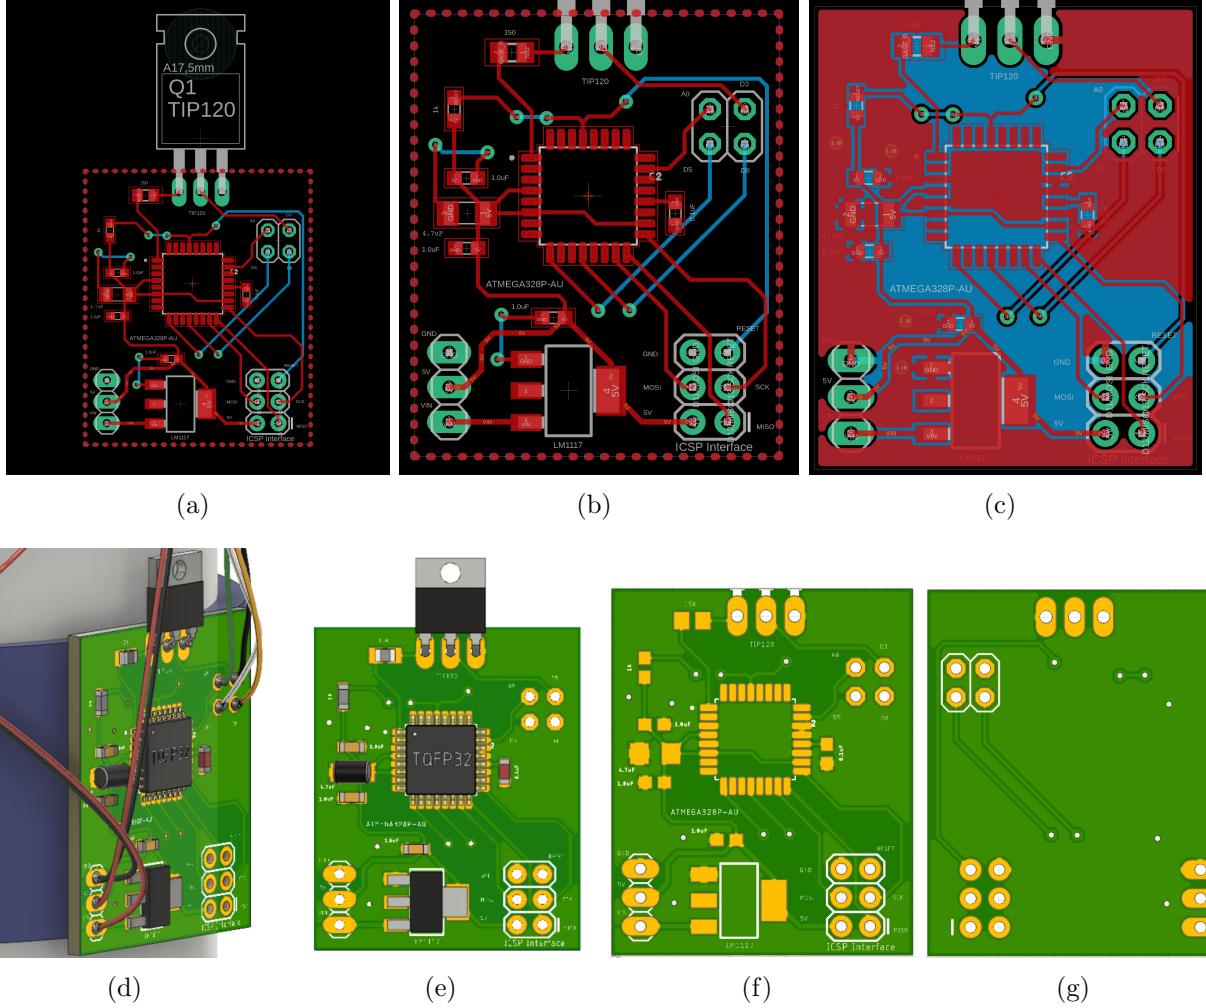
PCB board with dimensions 1.050 x 1.274 inches. (a) Board layout with transistor. (b) Zoomed in view of board. (c) Board showing GND planes (red). (d) Wired PCB on bottle. (e) Front CAD view. (f) CAD without board components. (g) CAD back view without board components.
